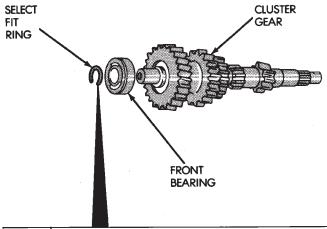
Selecting Input Shaft Front Bearing Snap Ring
